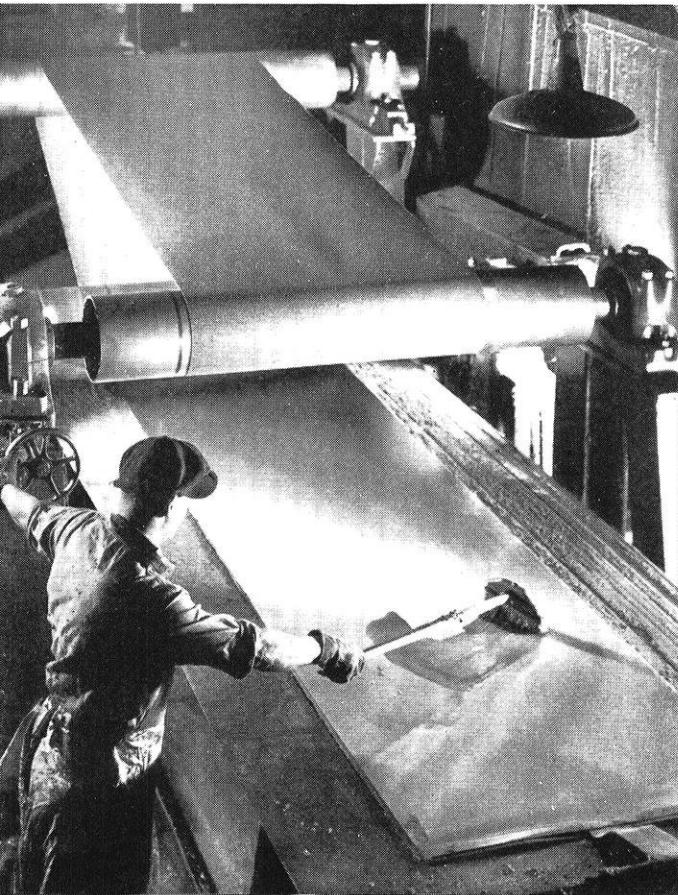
(Upper left). Rough-grinding stainless steel, Wood Works. The operator is slushing grease on the sheet.
